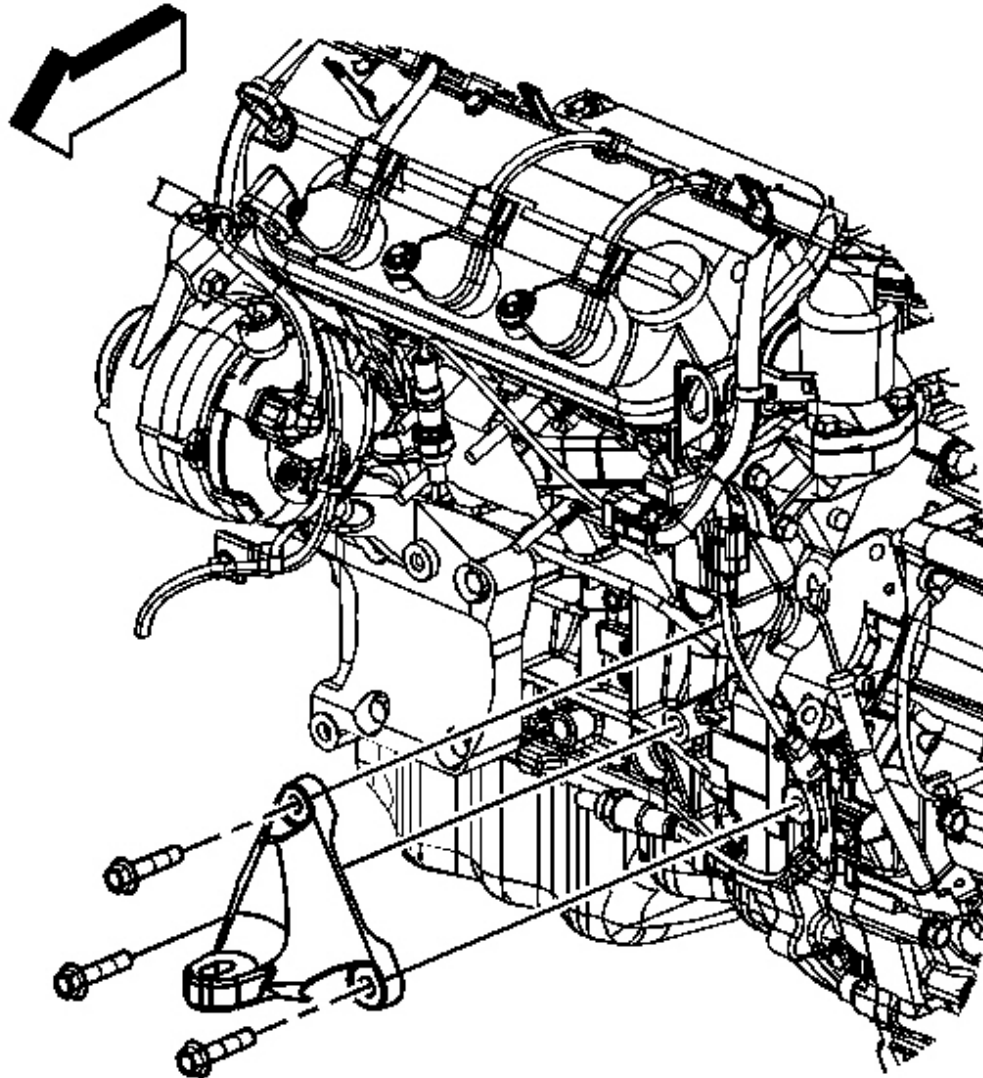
Front Transmission Mount Bracket-To-Transmission Bolts
